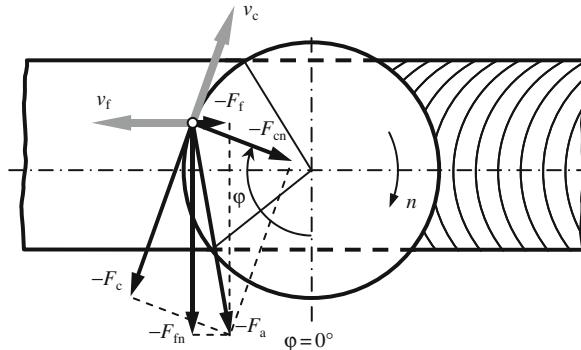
Cutting force components at head face milling, according to KAMM [Kamm77]
